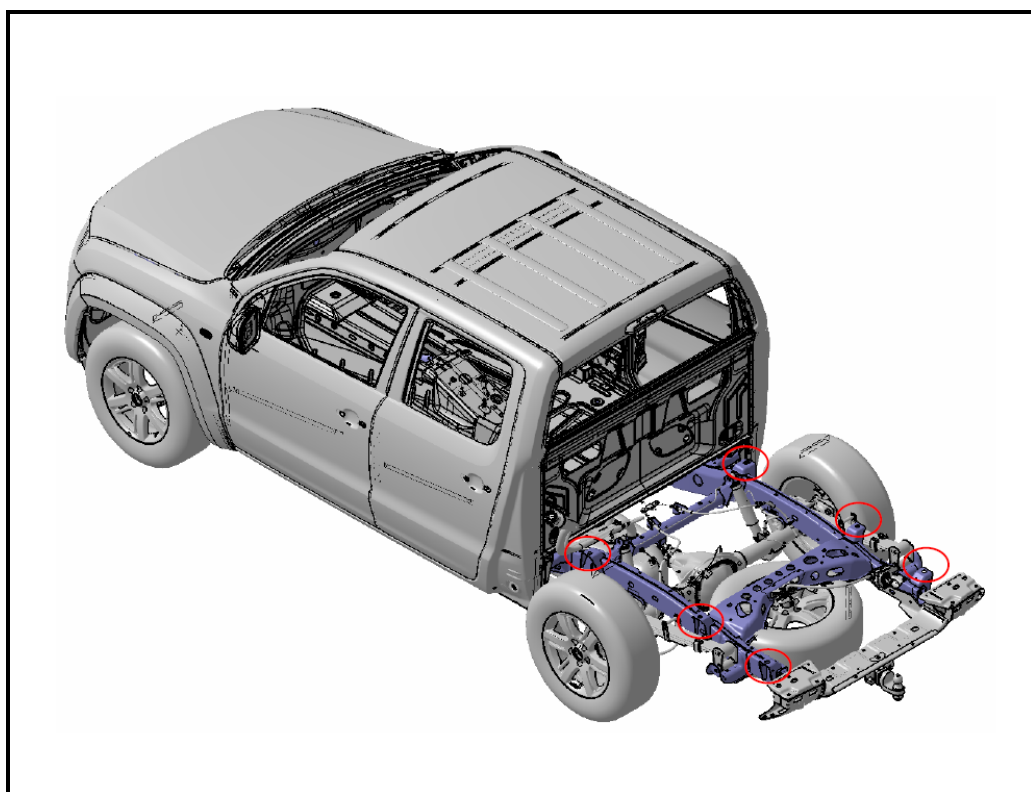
Amarok Double Cab – mounting brackets for cargo box (see red mark!)
